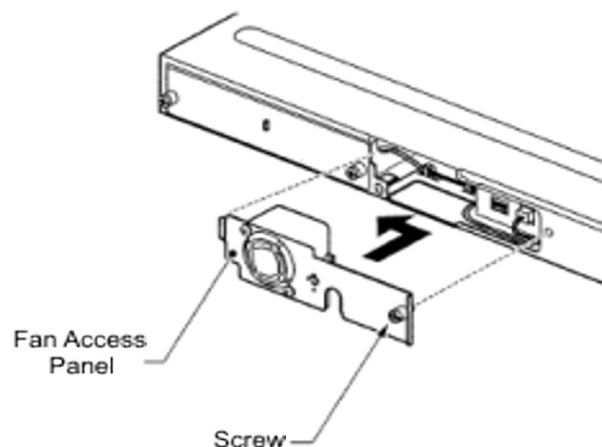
Re-Install Fan Access Panel (CHS1U-AU Chassis)
